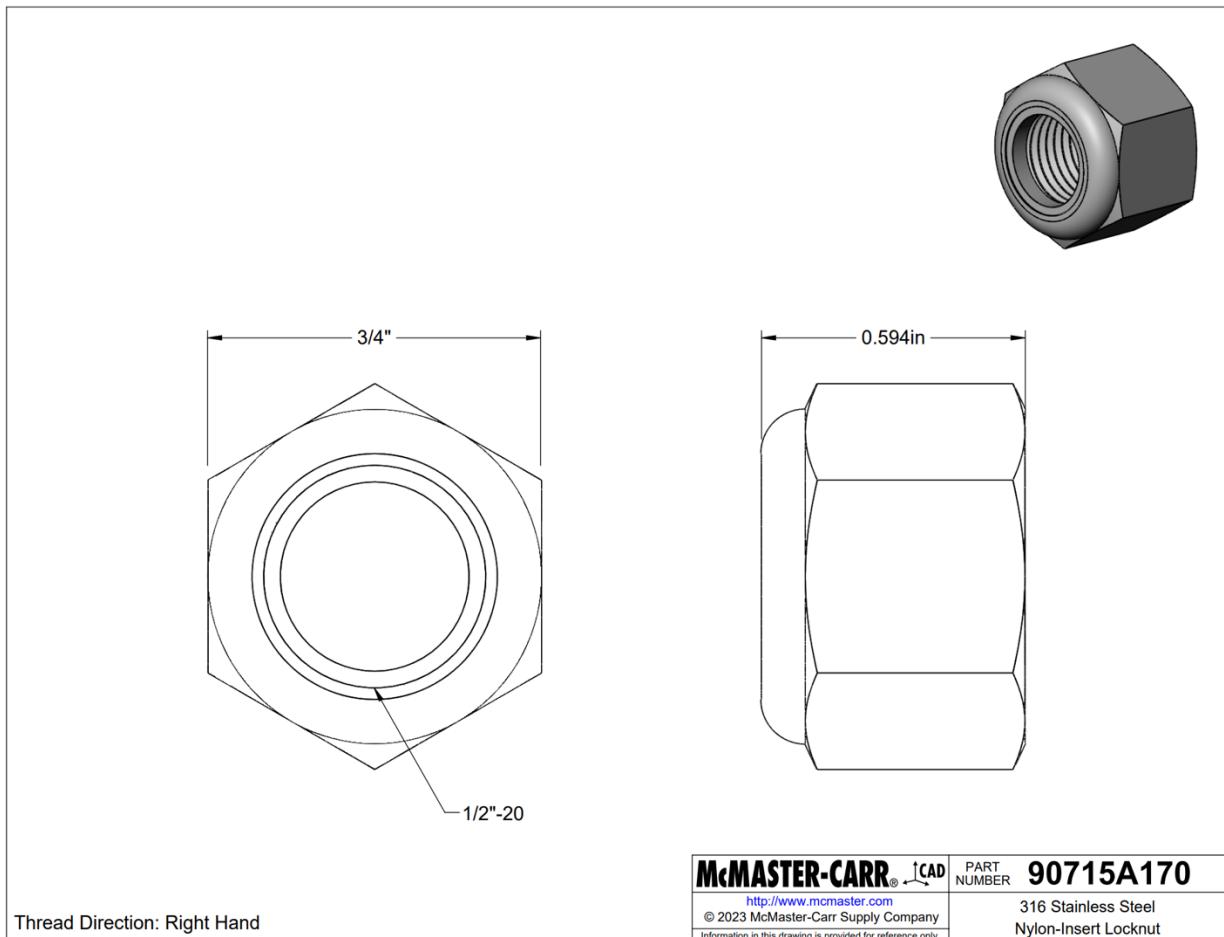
2D CAD drawing of the 90715A170 locknut
